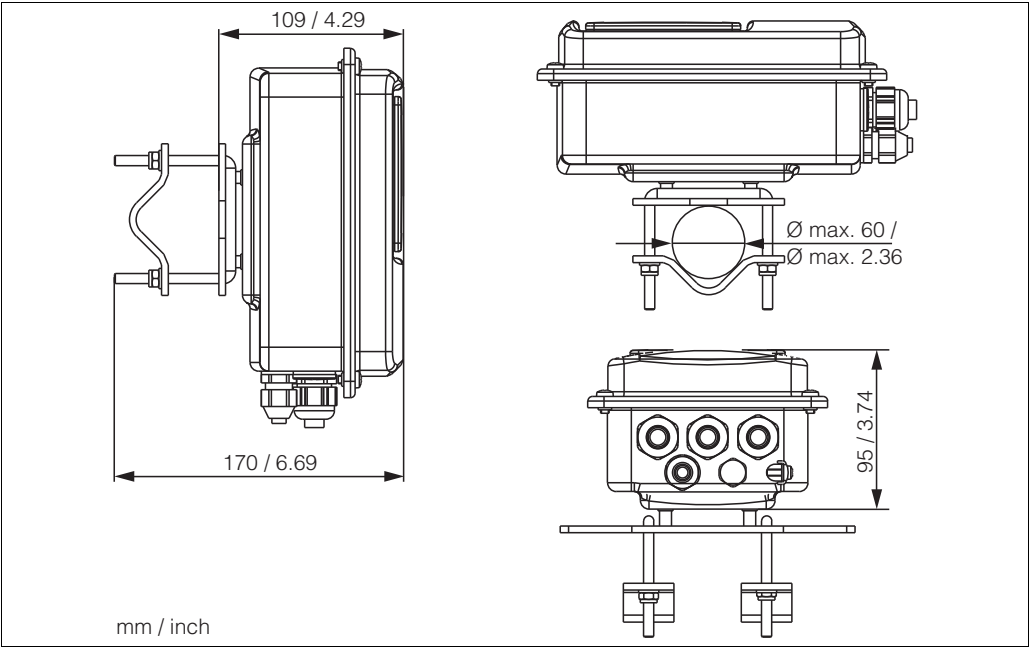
CLD134 mounting on pipes Ø 60 mm (2.36")
